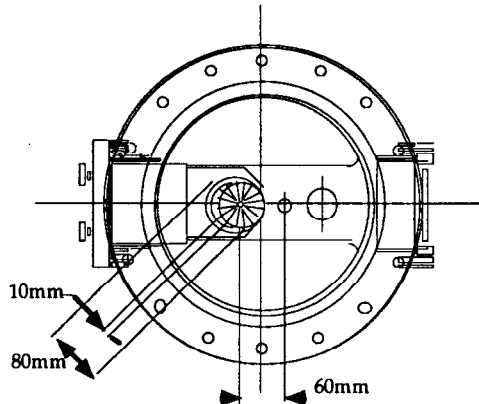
Cross section of the beam pipe at $z = 1.5$ m.
